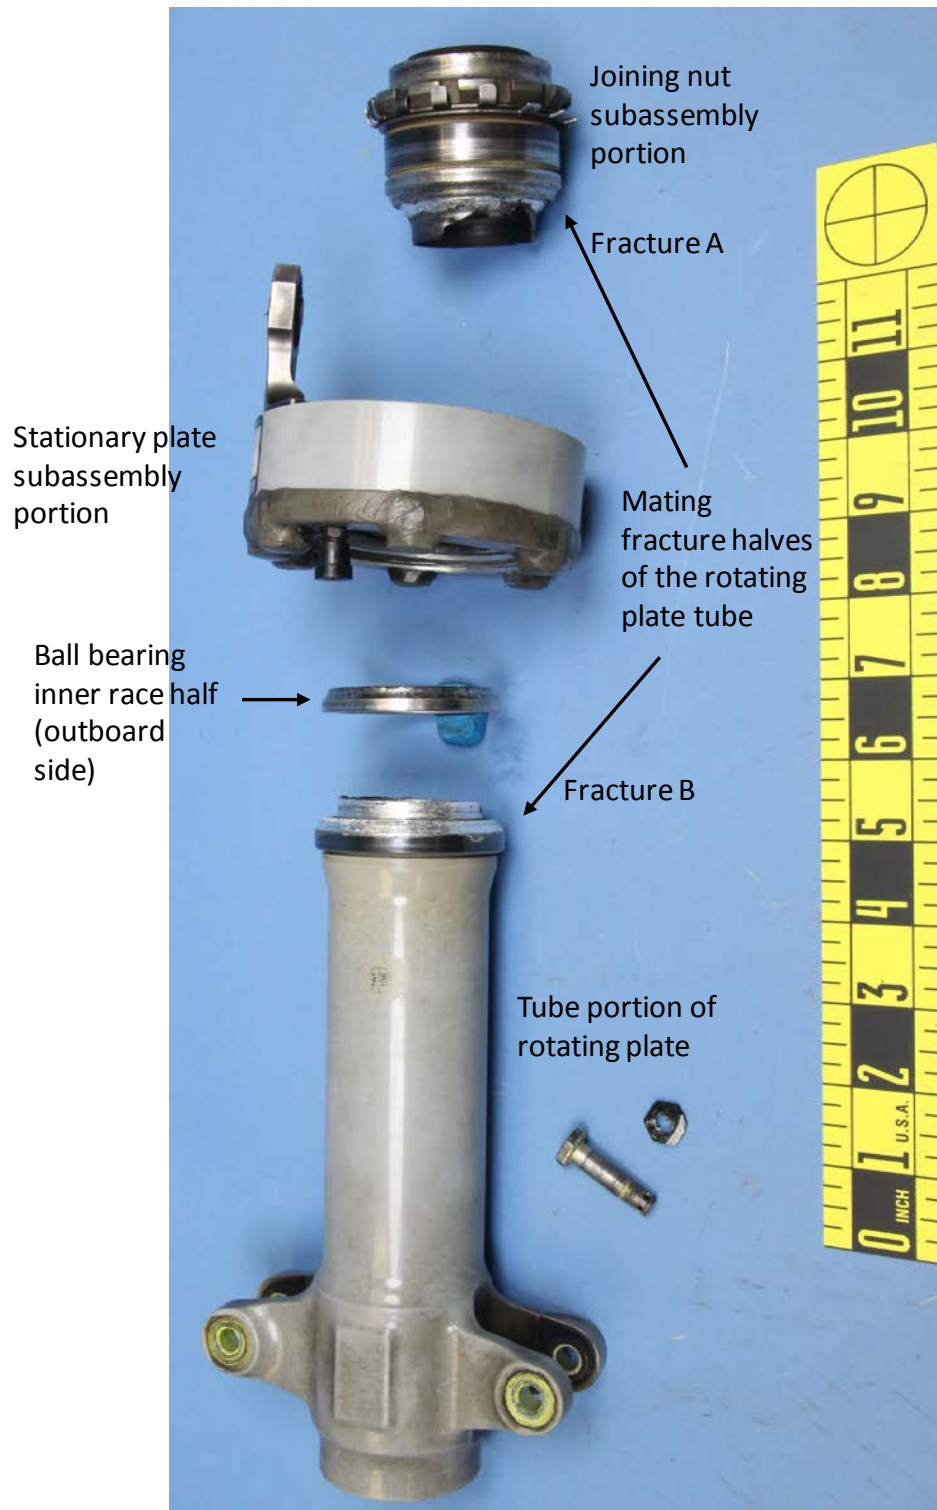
As-received pieces of the rotating and stationary plate assembly. Depicted in approximate order of assembly.
